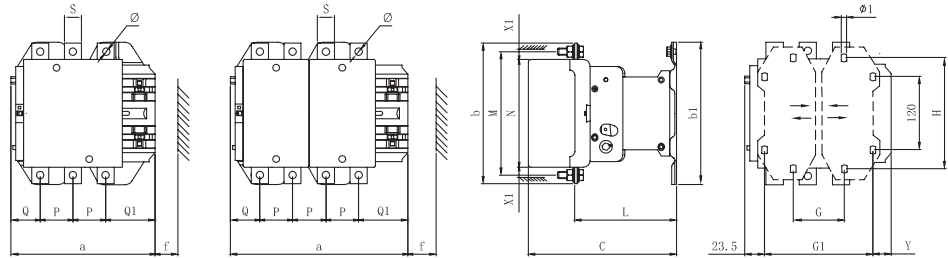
Outline and installation dimensions of CJX2F-400, 4004, 500, and 5004
